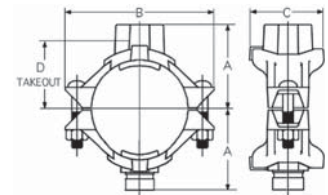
Mechanical Tee with One Female NPT/ISO 7-1 Threaded Branch & One Grooved Branch (Cross Configuration\*)
